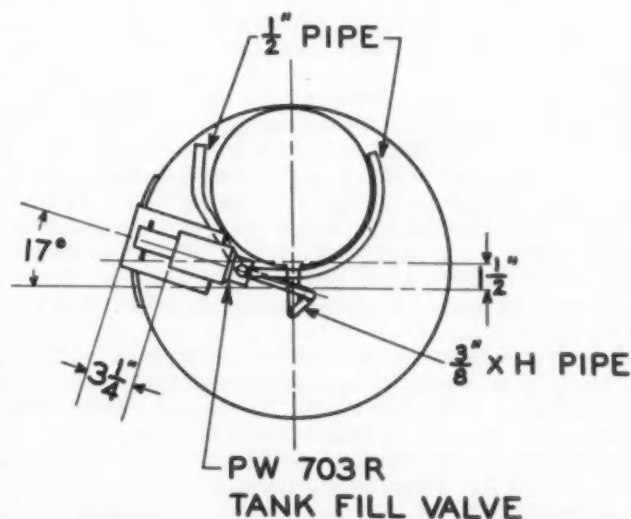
Parkhill-Wade safety fuel tank in cross-section
